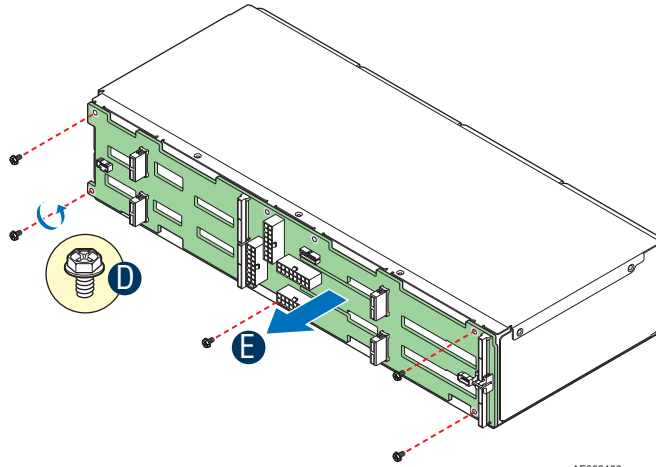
Removing the 3.5" Backplane Board from the Drive Cage
